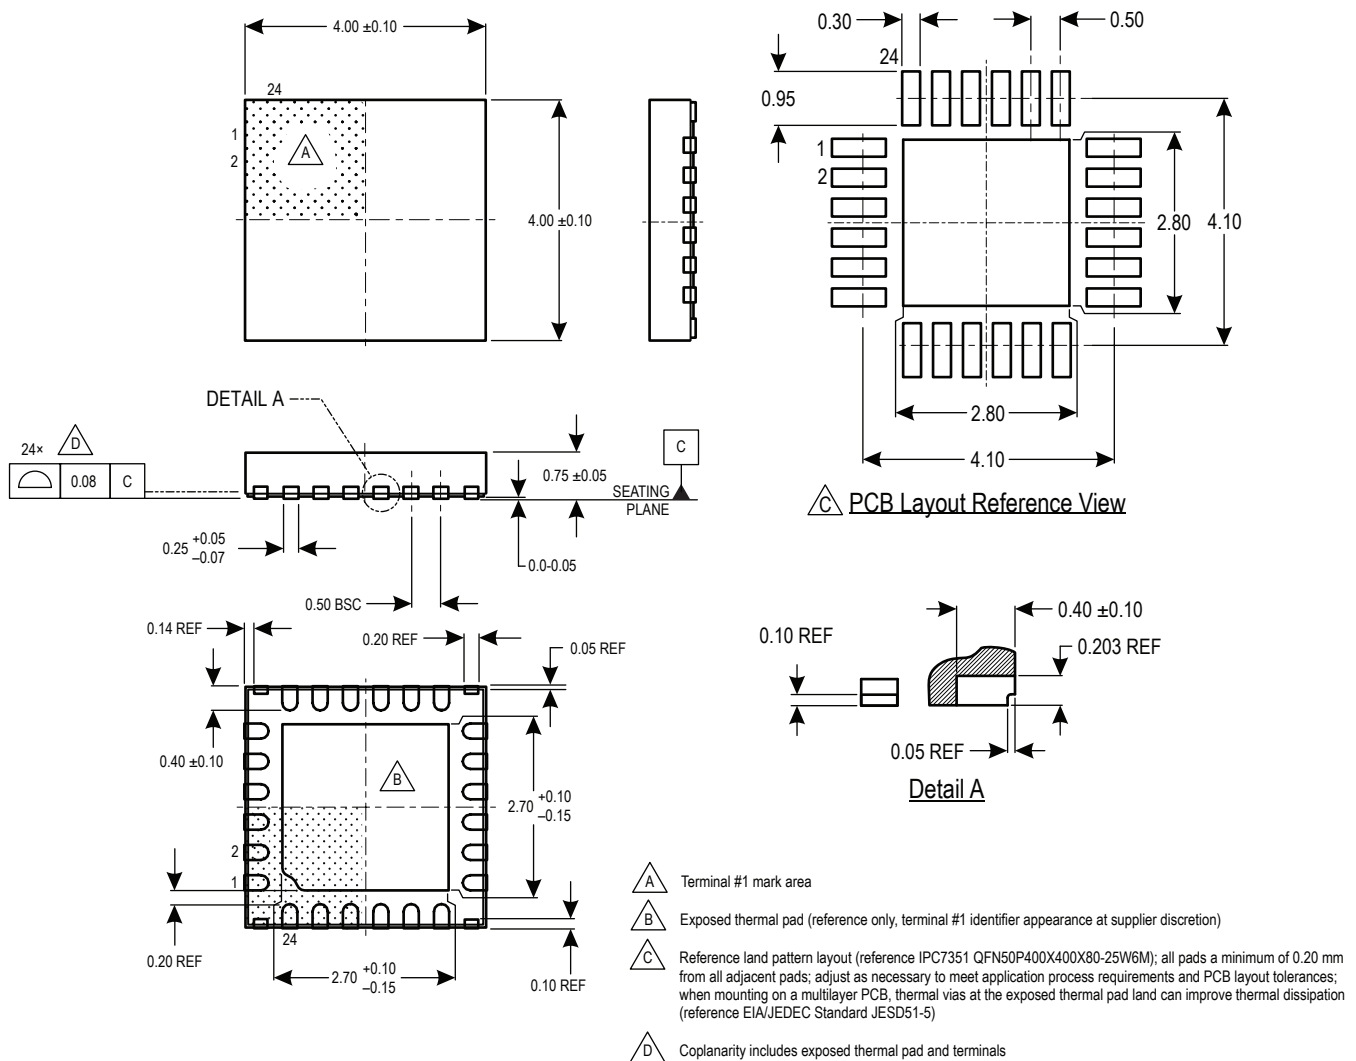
Package ES, 24-Pin 4 mm x 4 mm QFN with Exposed Thermal Pad and Wettable Flank
